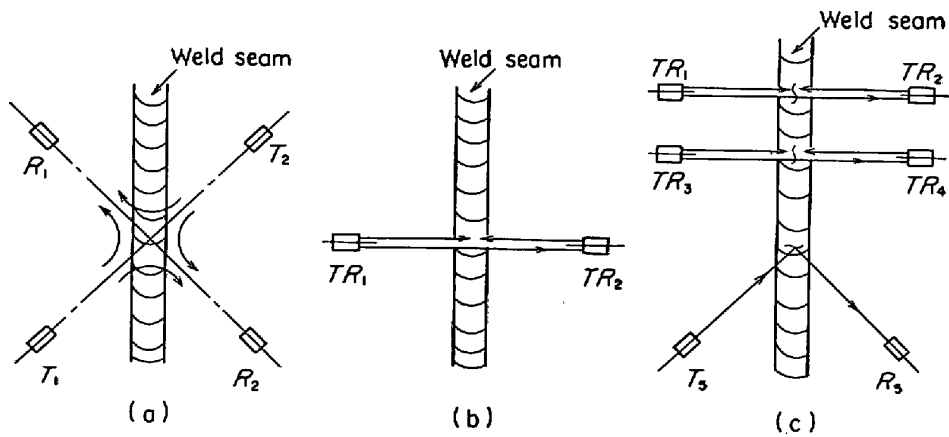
Various probe arrangement in UST of welded joints.
